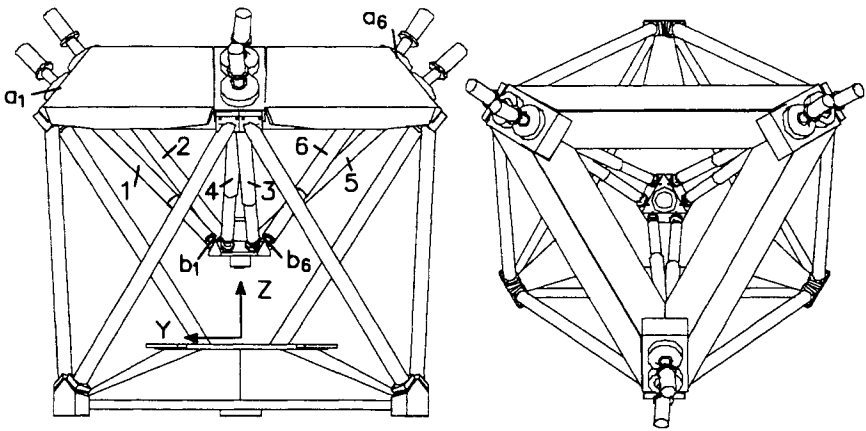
Front and top view of the prototype hexapod machine tool located at NIST
